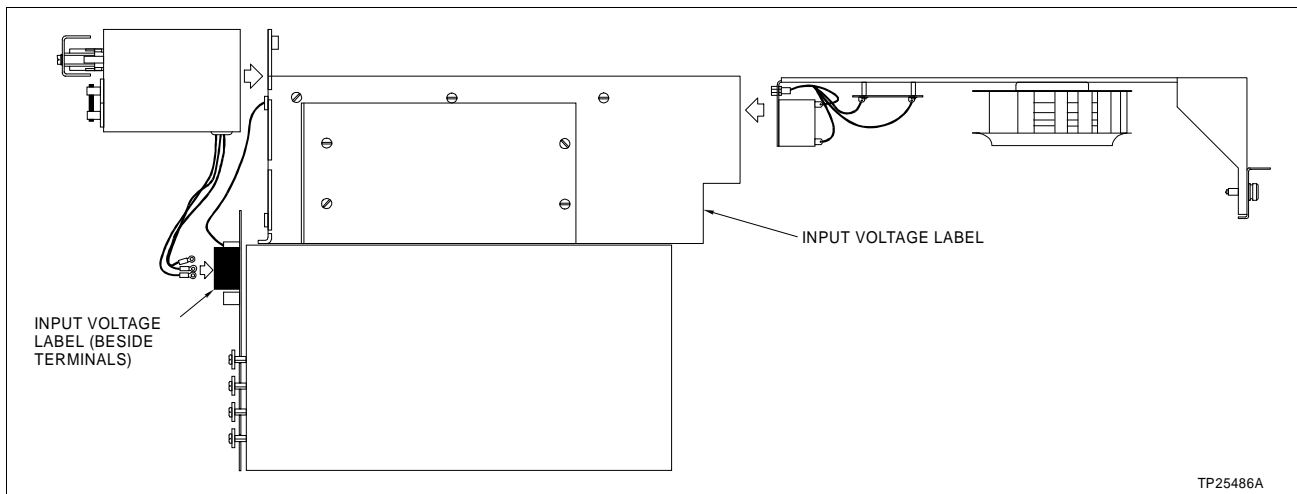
Power Entry Circuit Breaker or Switch and Fan Assembly Installation (Side View)
